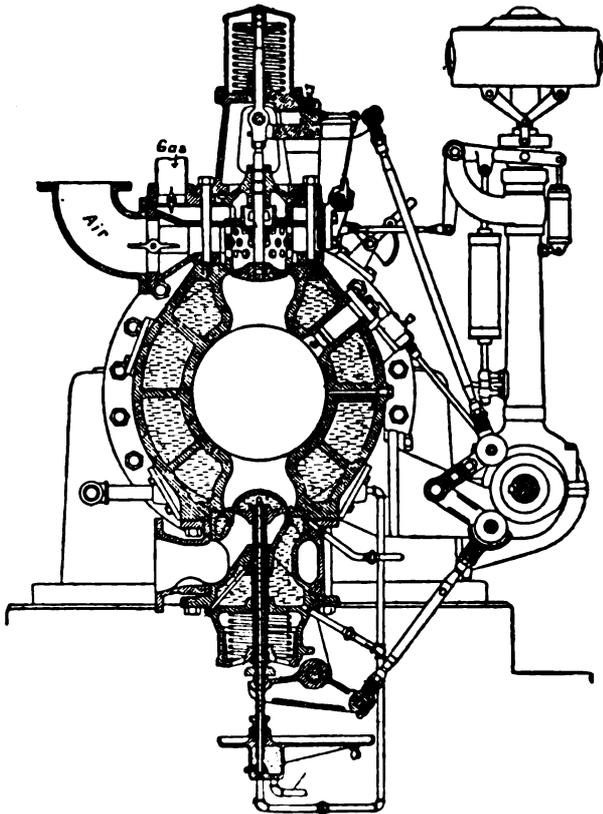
Transverse section of Struthers Wells Co.'s Tandem Engine.
